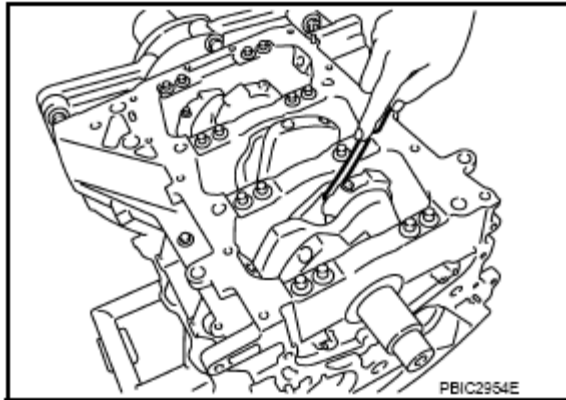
Measuring Side Clearance Between Connecting Rod And Crankshaft Arm Using Feeler Gauge
